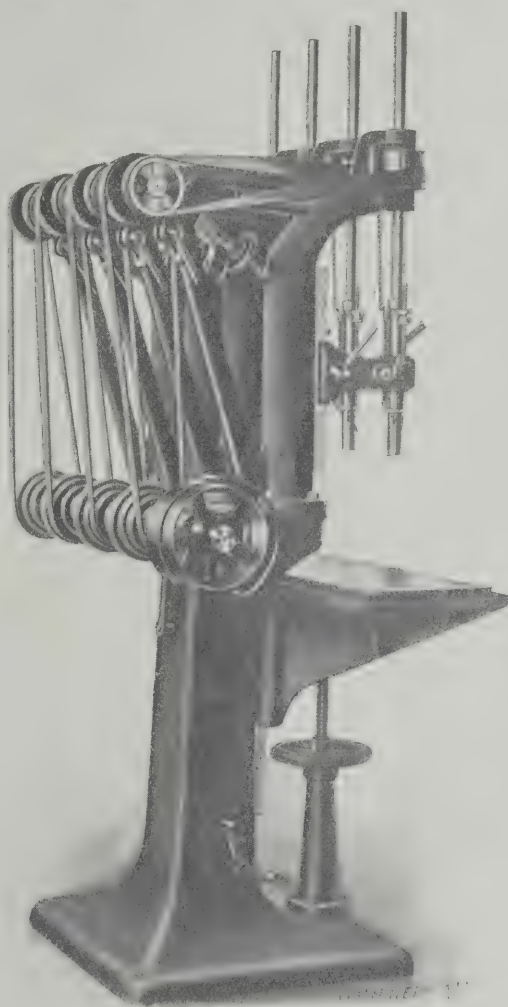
Rear View of Leland Sensitive Drill, showing Driving Arrangement
